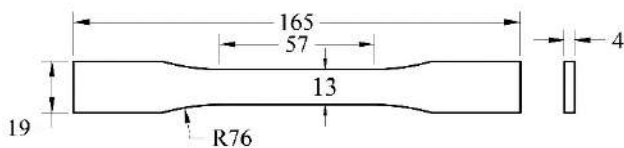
Dimensions of the ASTM D638 Type I tensile specimen, dimensions in mm
